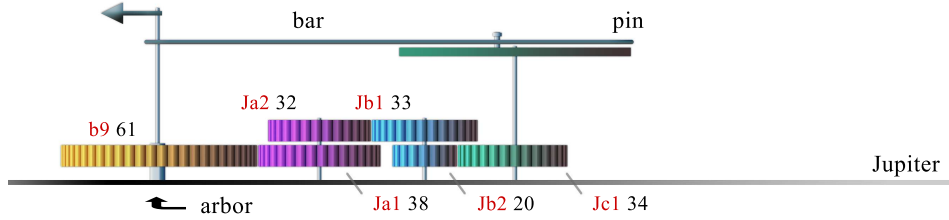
Side view of the optimized gearing schematic diagram of the Jupiter epicycle gear train, starting with a 61-teeth fixed gear instead of a 32-teeth gear. Further properties are equal to Figure 7.22.
